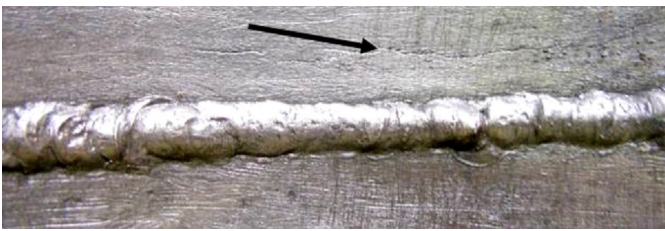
View of the A1 welded joint from the root side (from the inside of the pipe)
